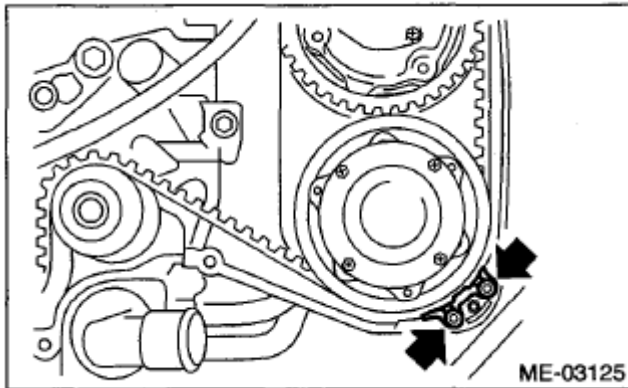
Locating Timing Belt Guide Mounting Bolts (2 Of 3)
